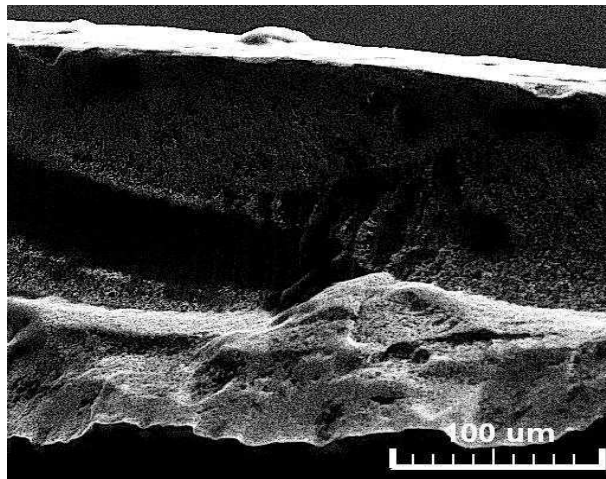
REM image of surface morphology of worn cutting edge at $T = 91,6$ min and $f_z = 0.08$ mm.tooth⁻¹ (exp. 500x)
